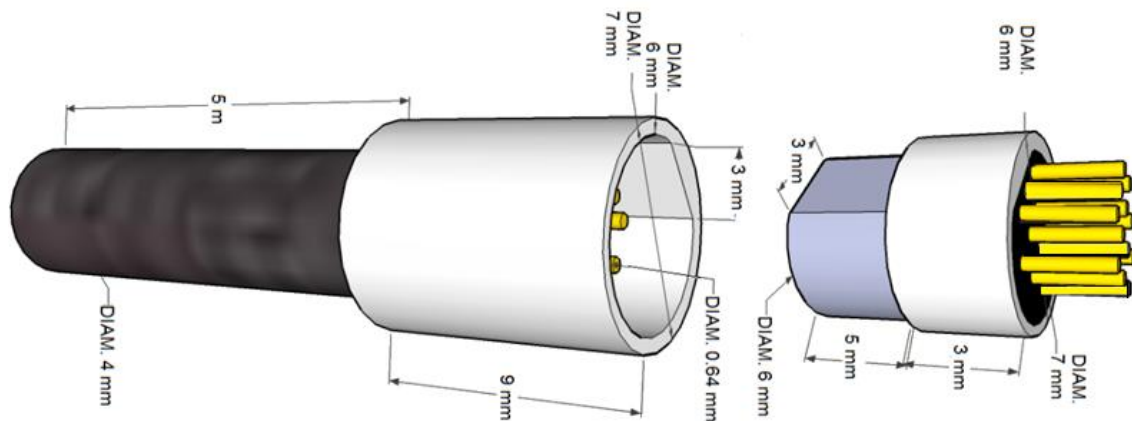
Scheme of the array design with the dimensions of the two sensor parts.
